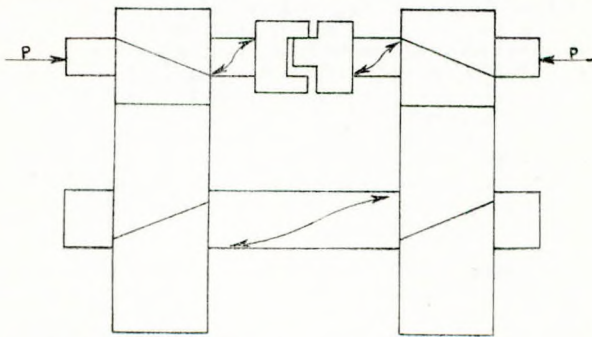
Power circulation in helical gears pre-loaded by axial thrusts applied to wheel shafts
